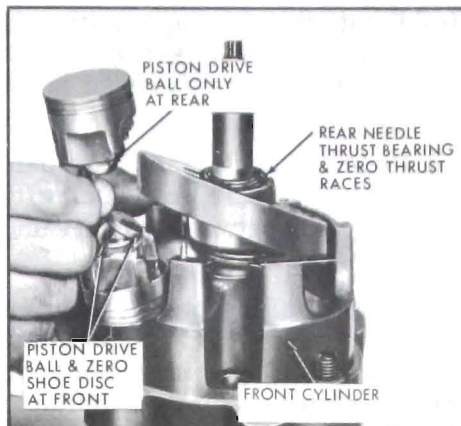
Installing Piston Assembly in Cylinder for Gauging
